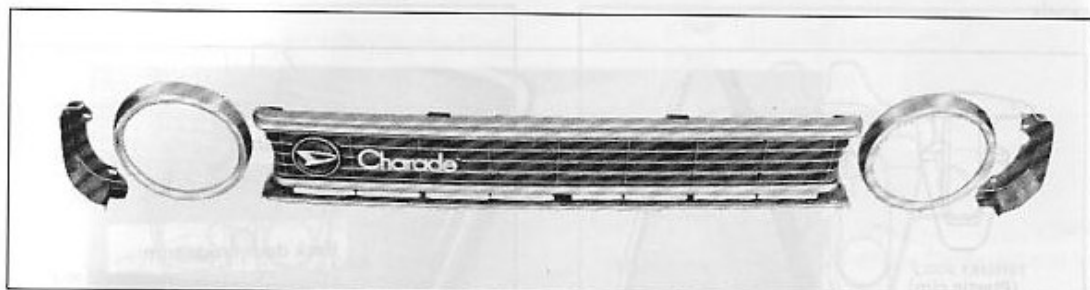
Radiator Grille and Headlamp Ornament Rings
